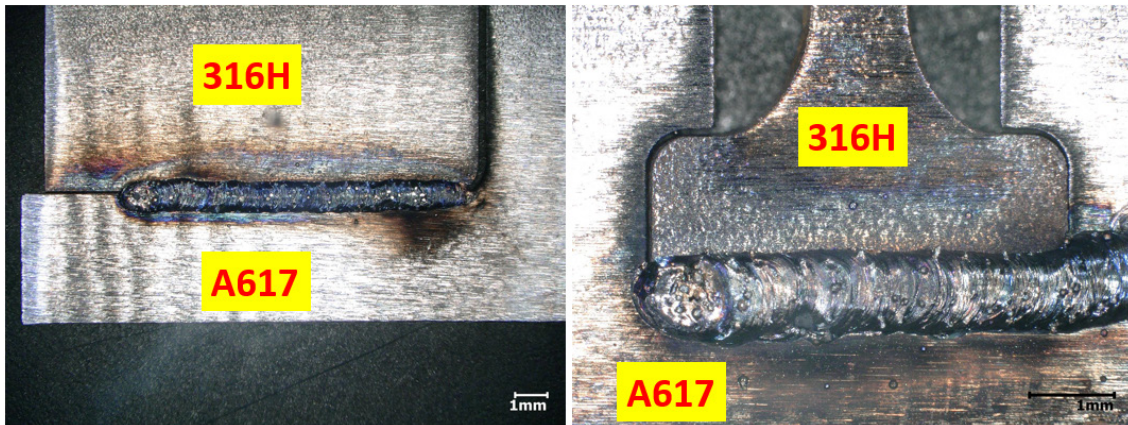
Welded regions of the WFSTA version 2 showing no solidification cracking.
